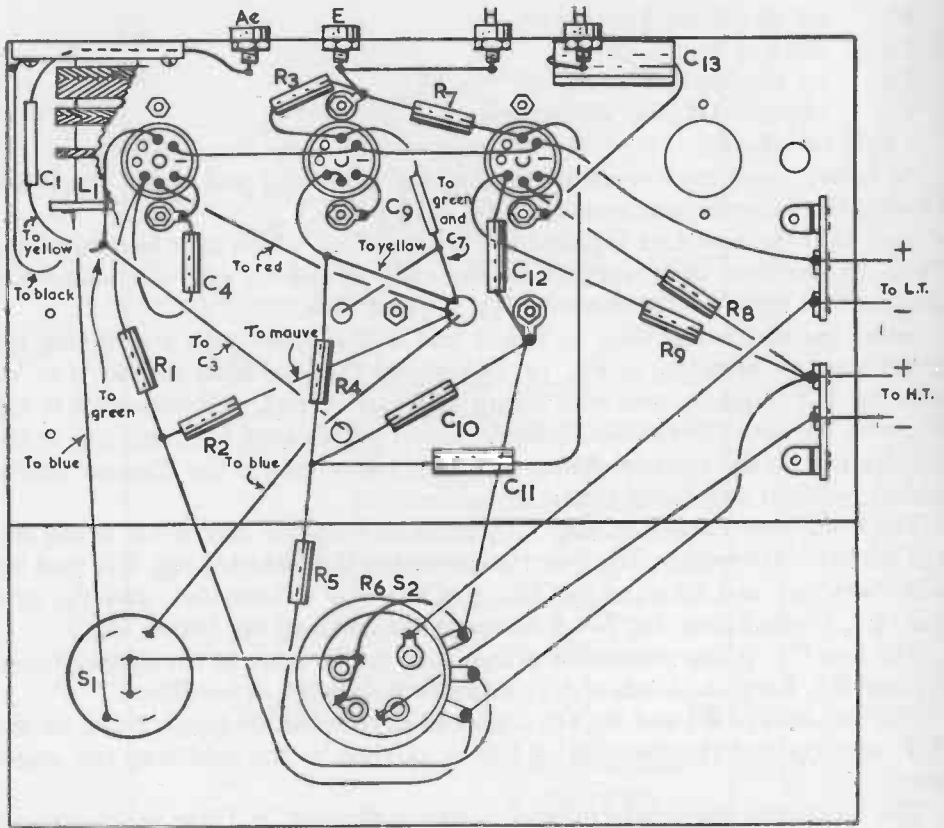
UNDER-CHASSIS VIEW OF THE THREE-VALVE RECEIVER.
